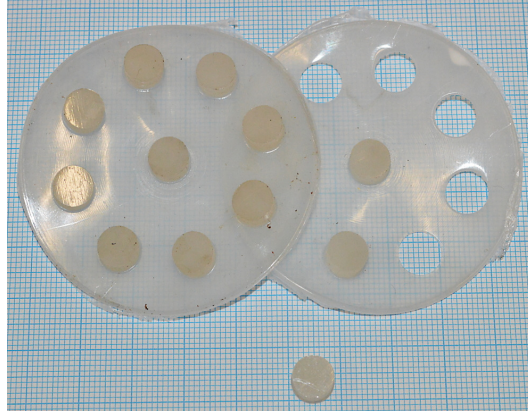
LLDPE specimens as extracted from the mould.
